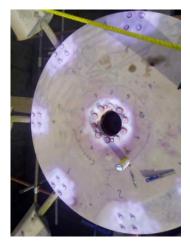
Critical places on the top holder for blades after evaluation of surface irregularity
